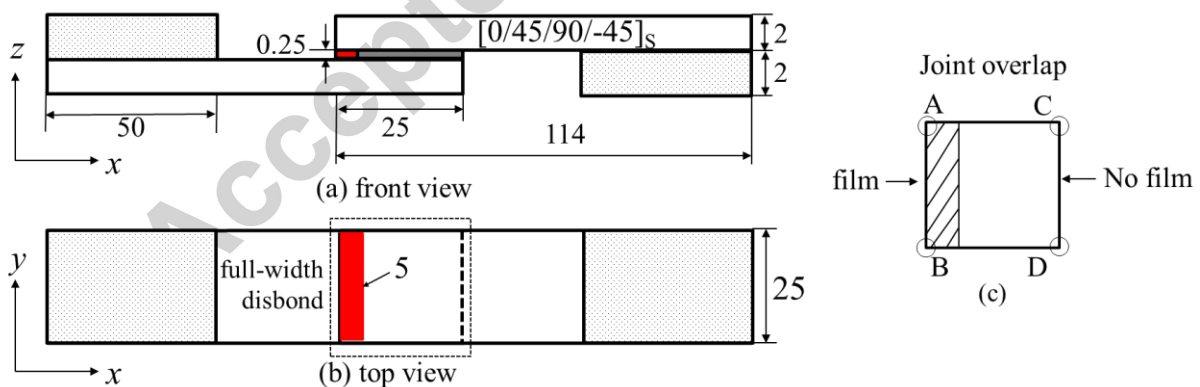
Geometry and dimensions of single lap joint with a full-width initial disbond of 5 mm (unit: mm): (a) front view and (b) top view; (c) enlarged view of joint overlap showing four corners for observing fatigue crack lengths: A and B at the end with an initial disbond, C and D at the opposite end without starter crack.
